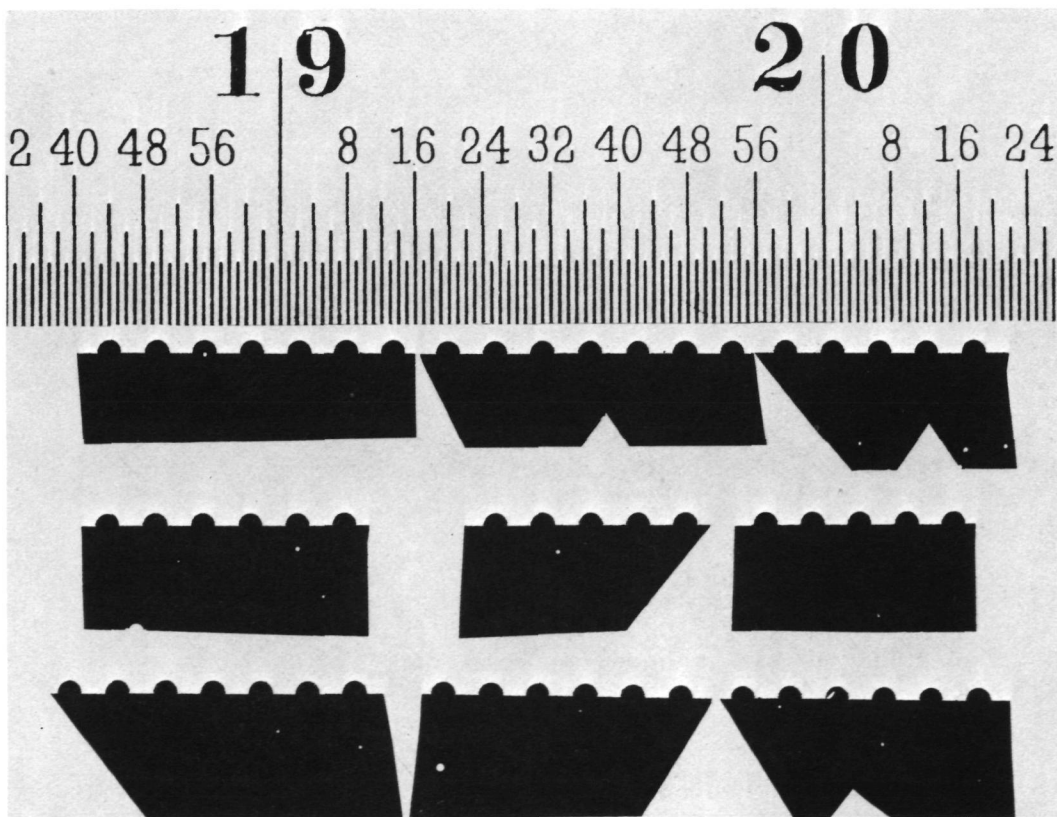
Section Views of Etched Plate Showing Typical Narrow Passage Shape
